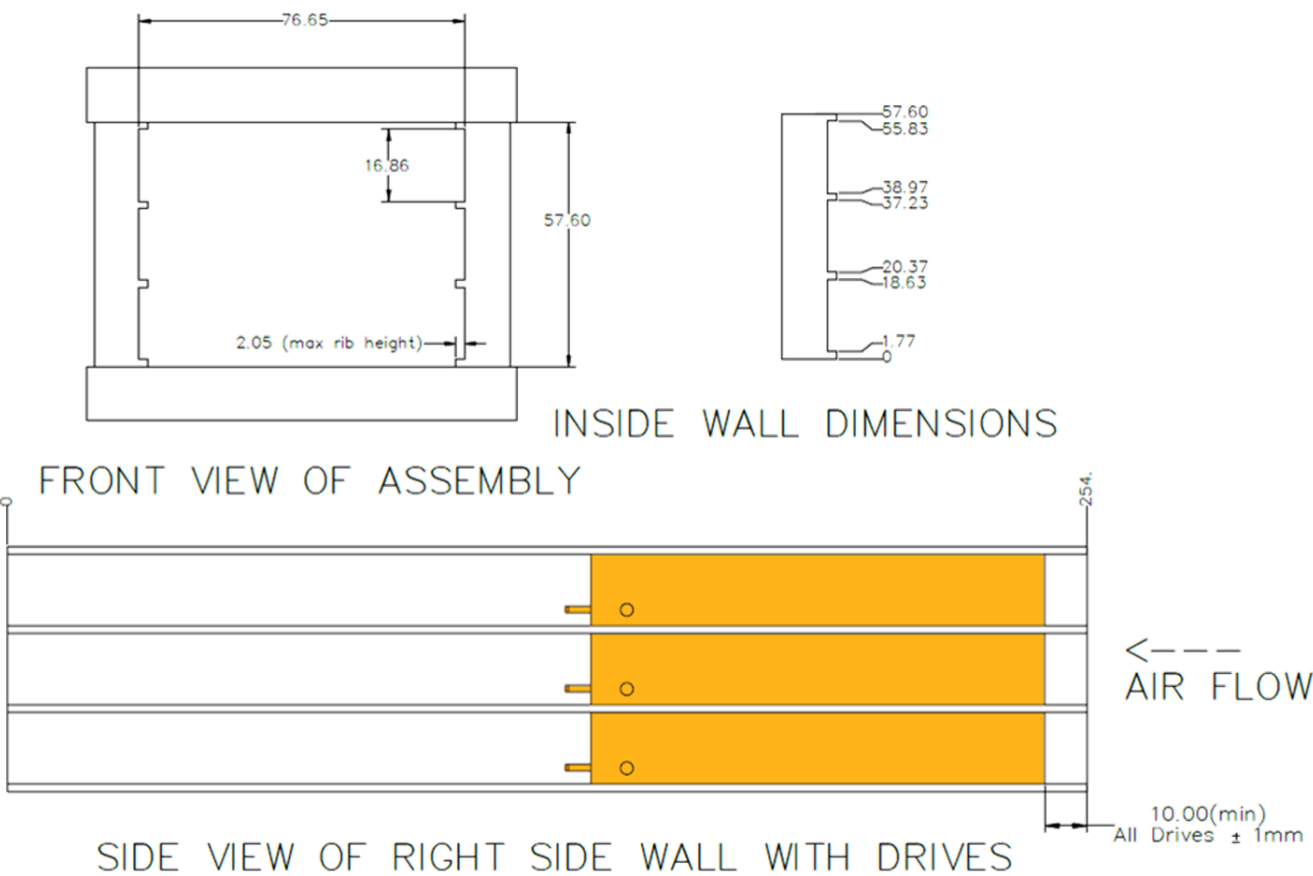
Required Dimensions of E3 2T Test Fixture
